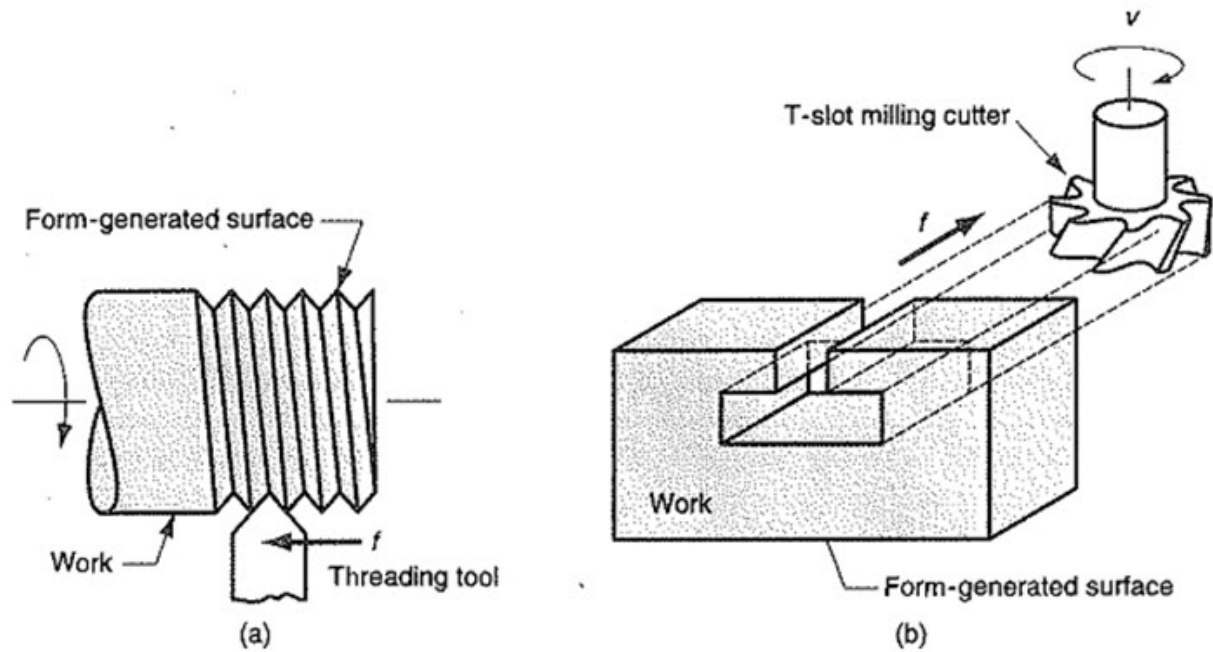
Combination of forming and generating to create shape: (a) thread cutting on a lathe, and (b) slot milling.
